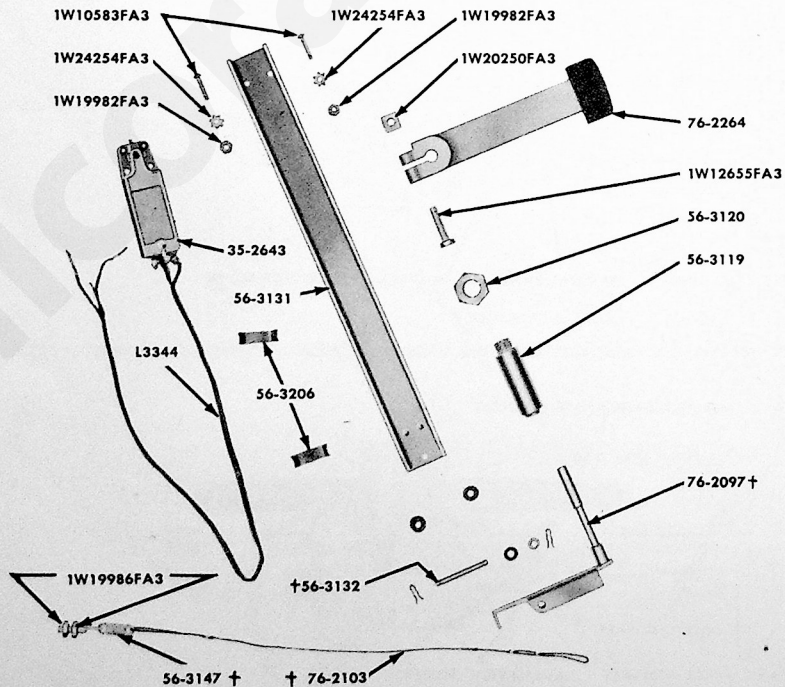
TOP VIEW OF MOTOR-BOARD AND PARTS.
